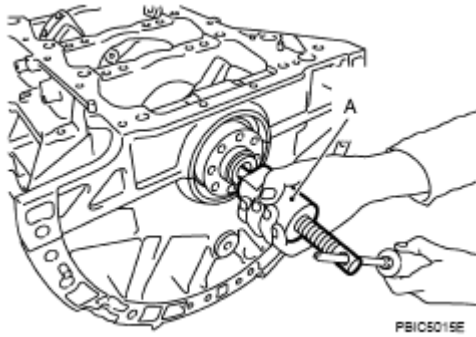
Using Appropriate Tool To Remove Pilot Bushing Or Pilot Converter
